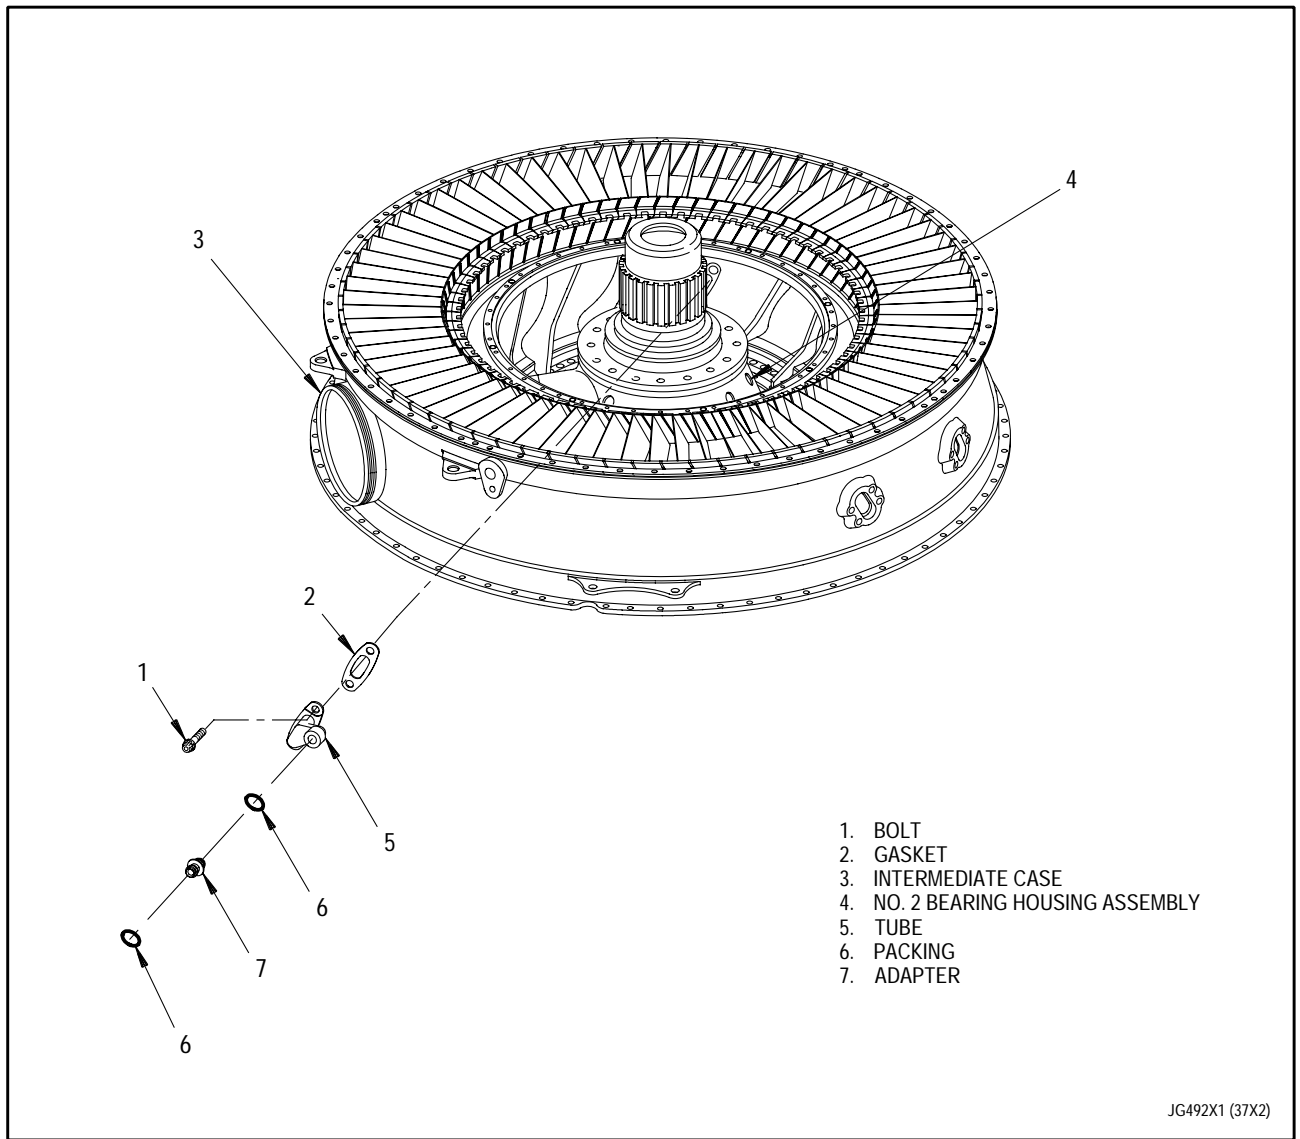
No. 2 and 3 Bearing Inner Oil Pressure Tubes - Removal (Typical Two Places)
